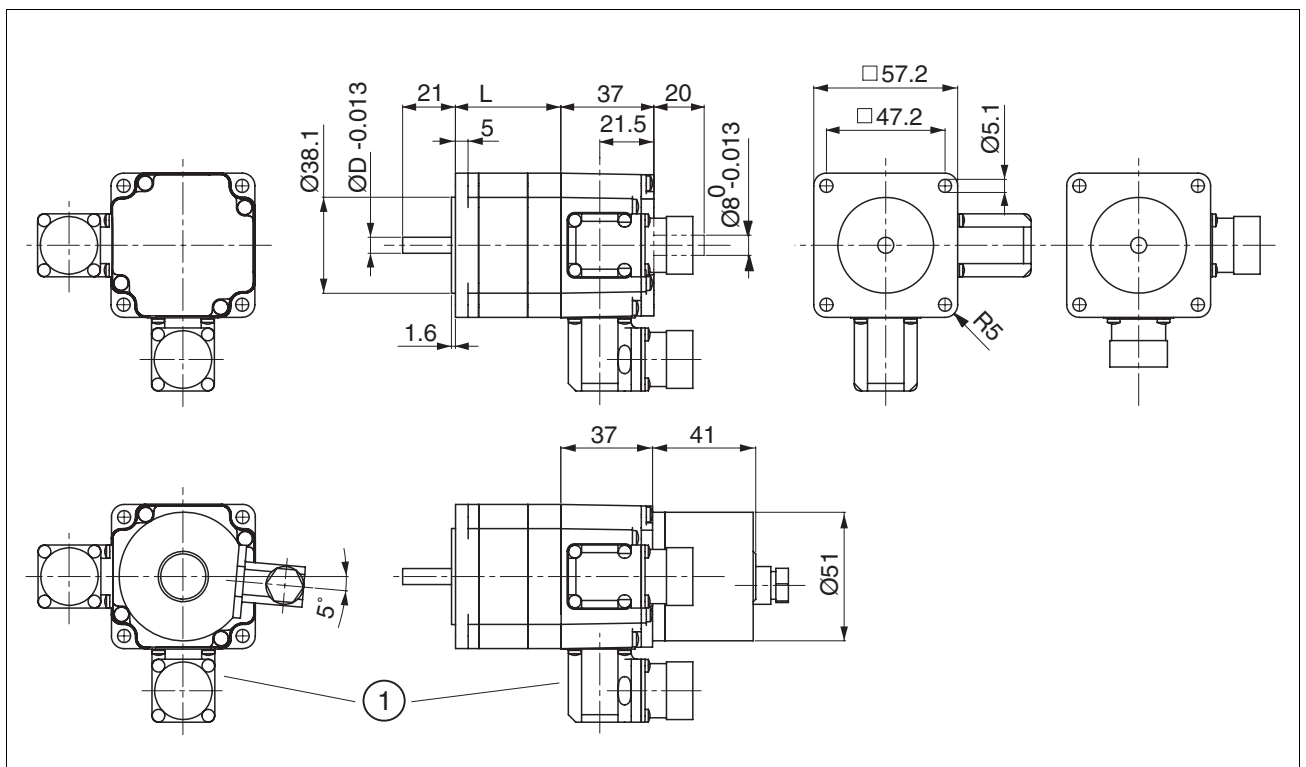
BRS36 dimensional drawing connector version with encoder
